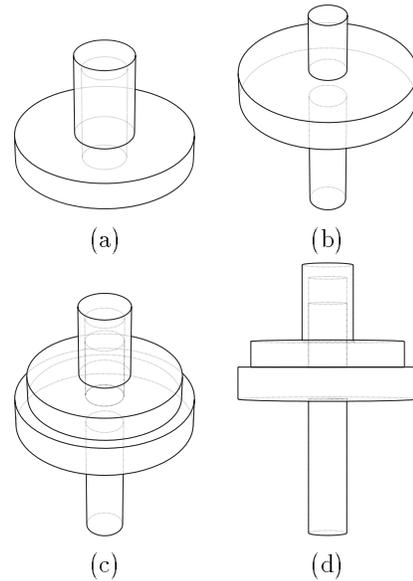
A simple assembly consisting of a cap (a) which fits over the tip of a spindle (b). Figures (c) and (d) show the completed assembly.
